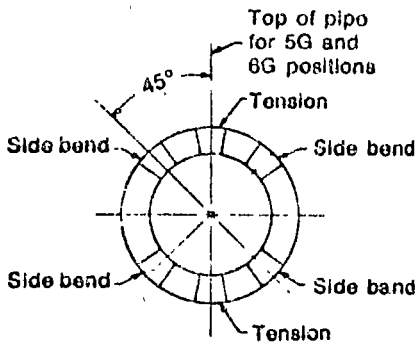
Location of test specimens for welded test pipe—6 in. or 8 in. in diameter.
